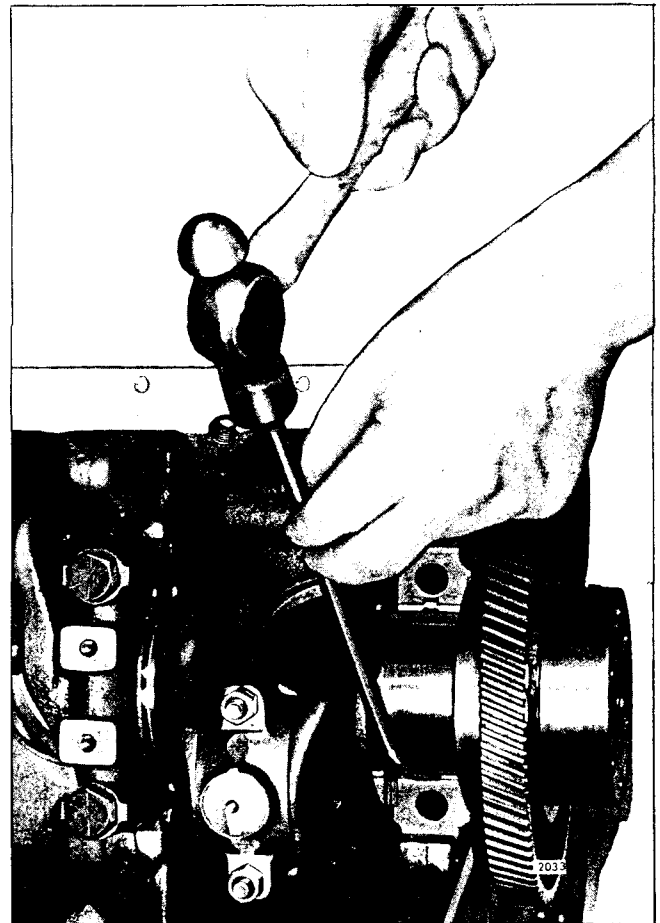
Removing Rear Main Bearing Upper Shell - Crankshaft in Place
